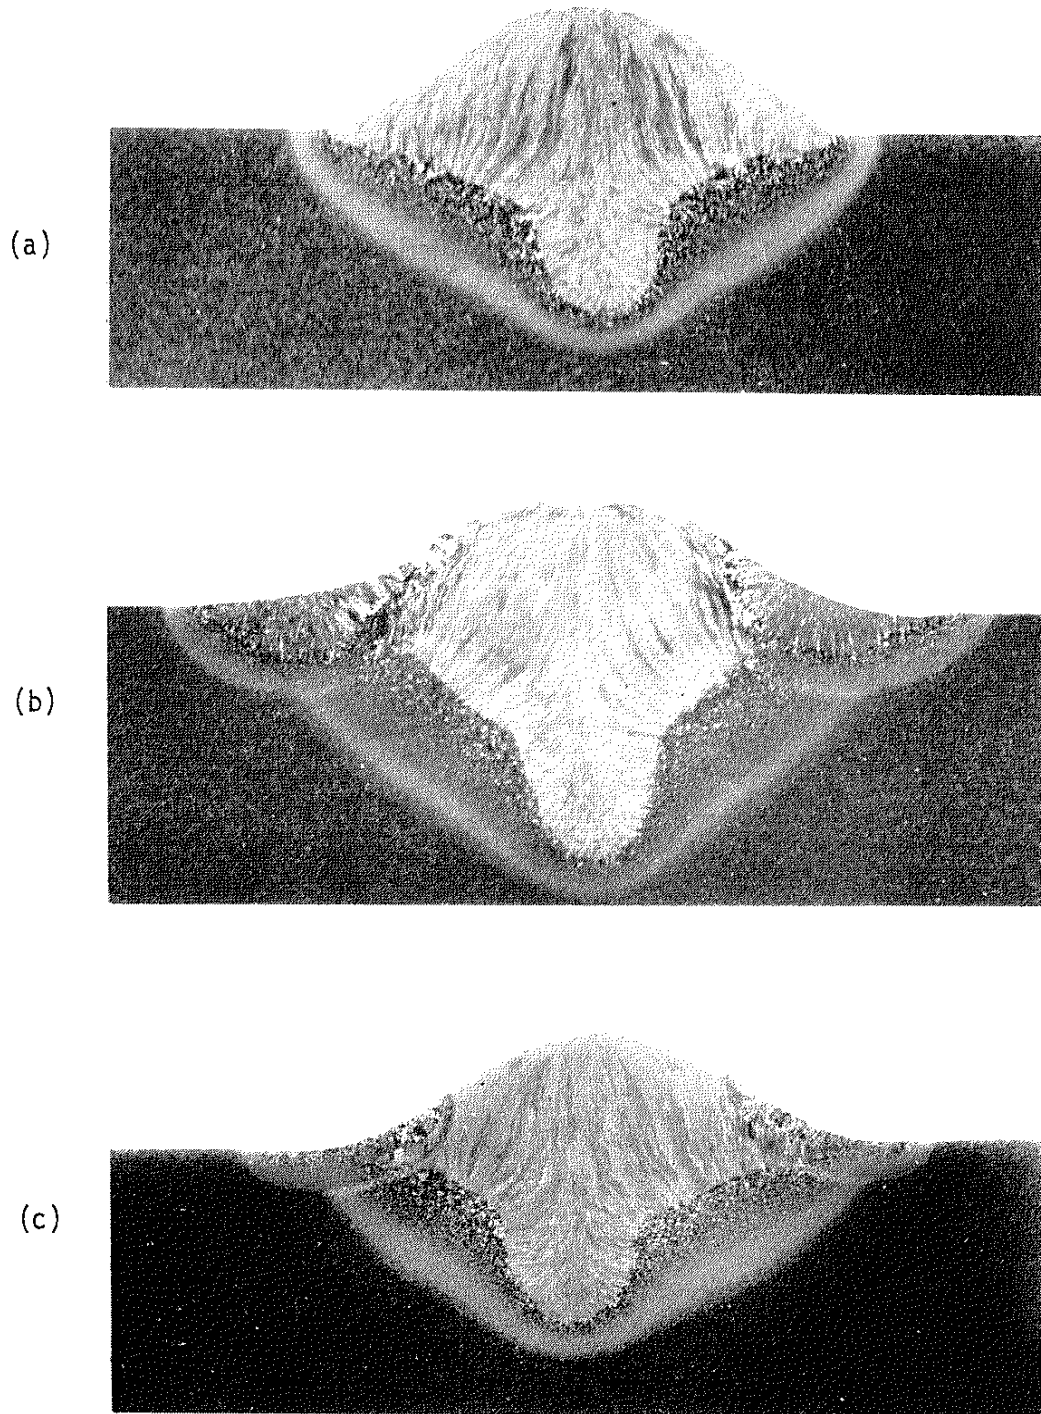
Macrographs (5.8x) of Cross-Sections for (a) As-Welded and Shot-Peened; (b) TIG-Dressed; and (c) Laser-Dressed A514/E110 Weldments.
